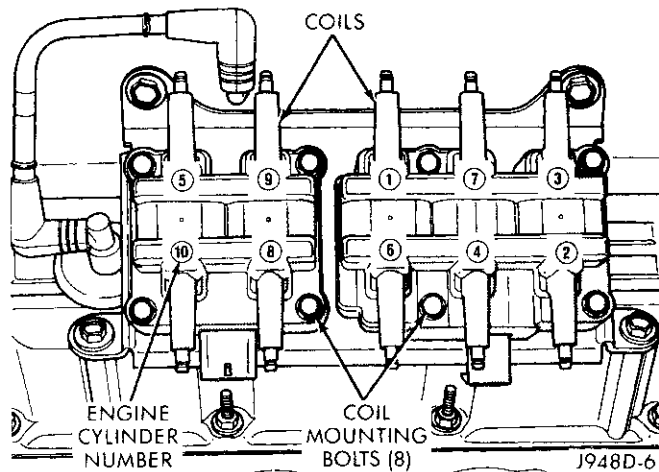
Ignition Coil Packs—8.0L V-10 Engine
